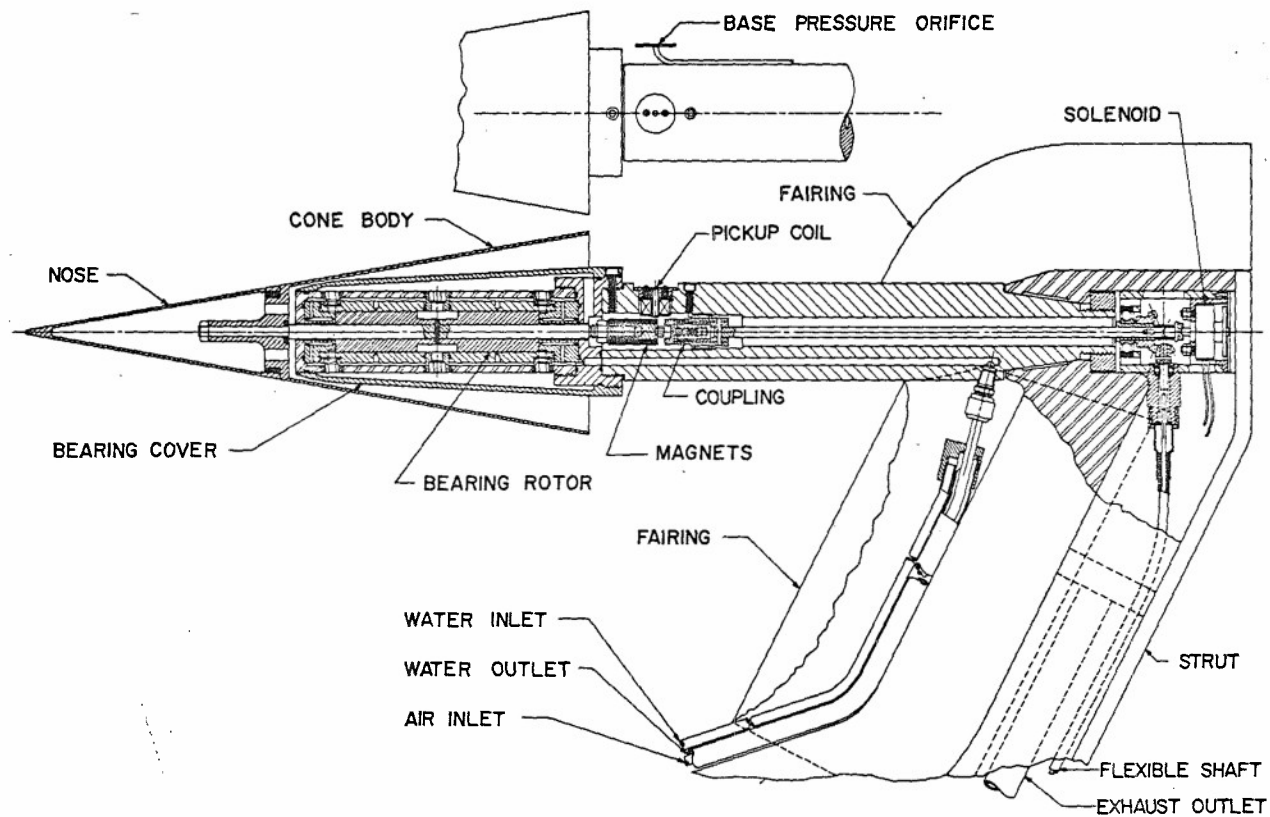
Cone Model - Bearing - Sting - Strut Assembly
